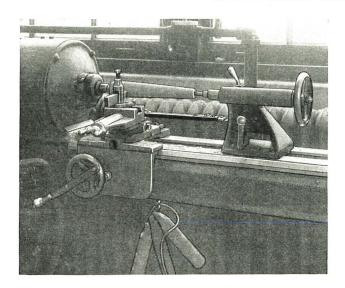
Finishing a Roughing Cut. Note Weight to Pull Carriage Against Former Guide.
